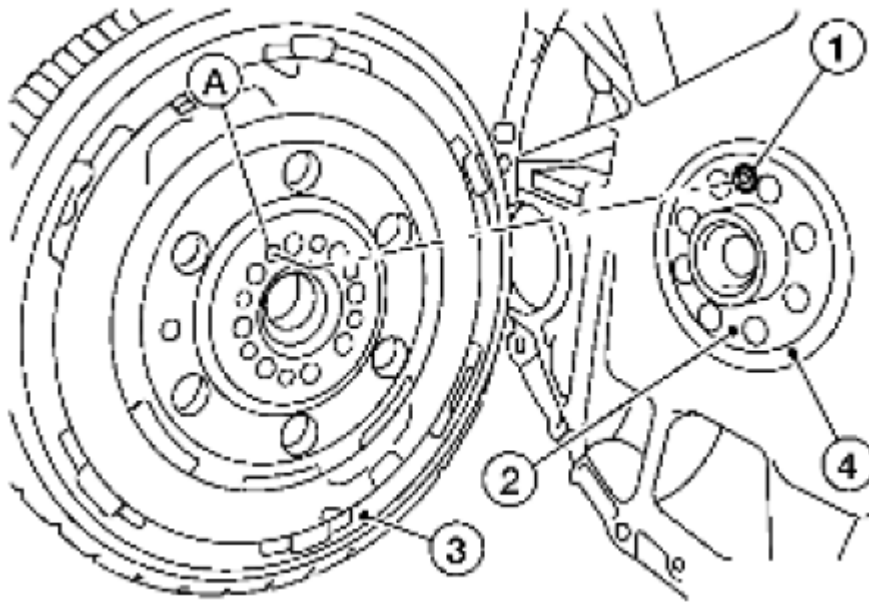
Aligning Crankshaft Side Dowel Pin To Flywheel Side Dowel Pin Hole
